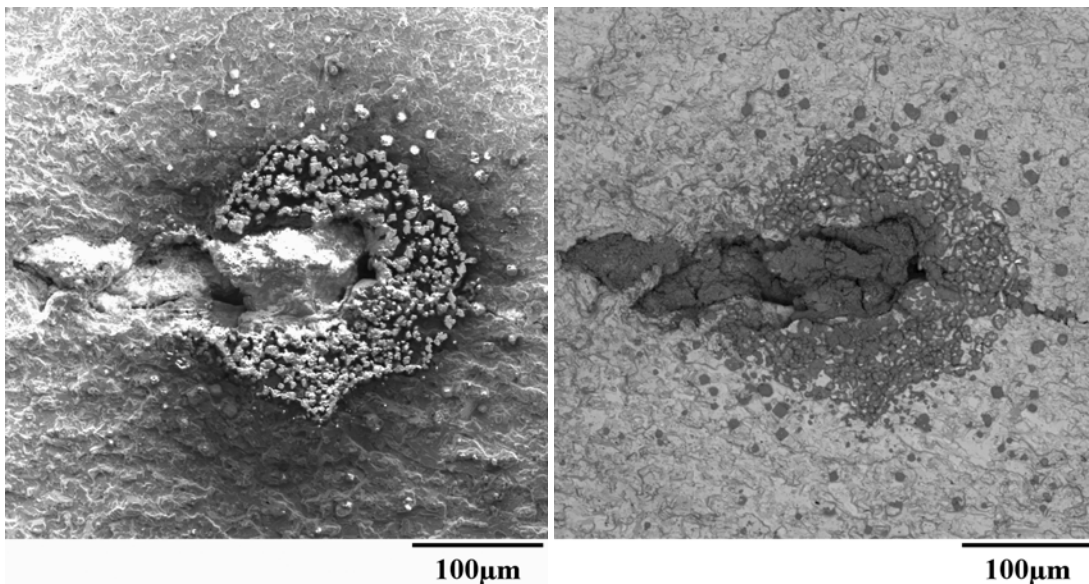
Secondary (left) and backscatter images of fracture surface for Ti64+1B specimen tested at 758 MPa and failing at 9,629 cycles.
